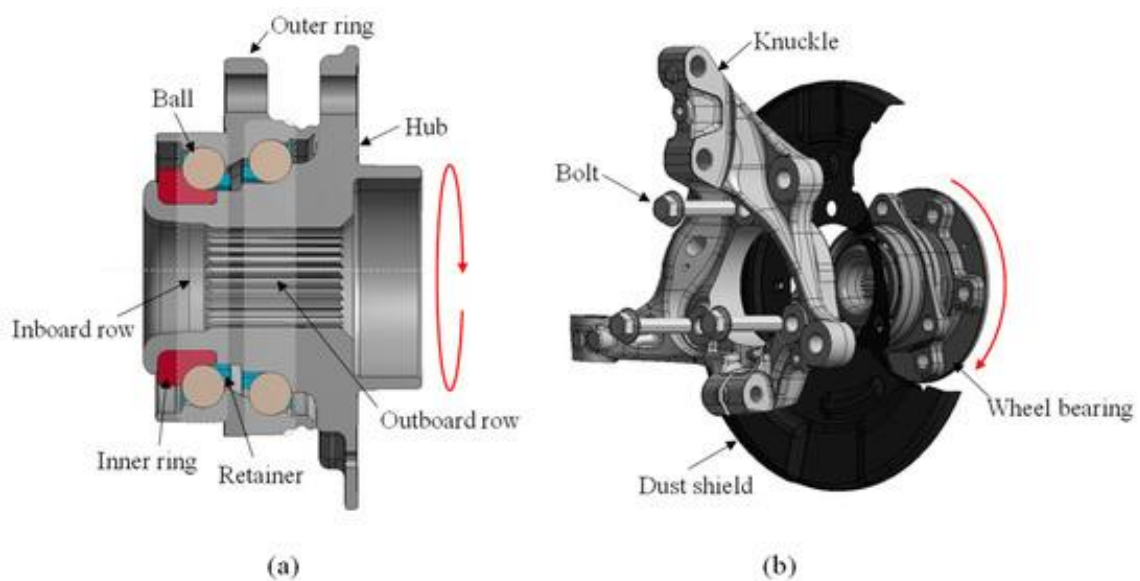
Car wheel bearing: (a) the HBU (b) assembly with main components (Kim, et al., 2022) Open access
